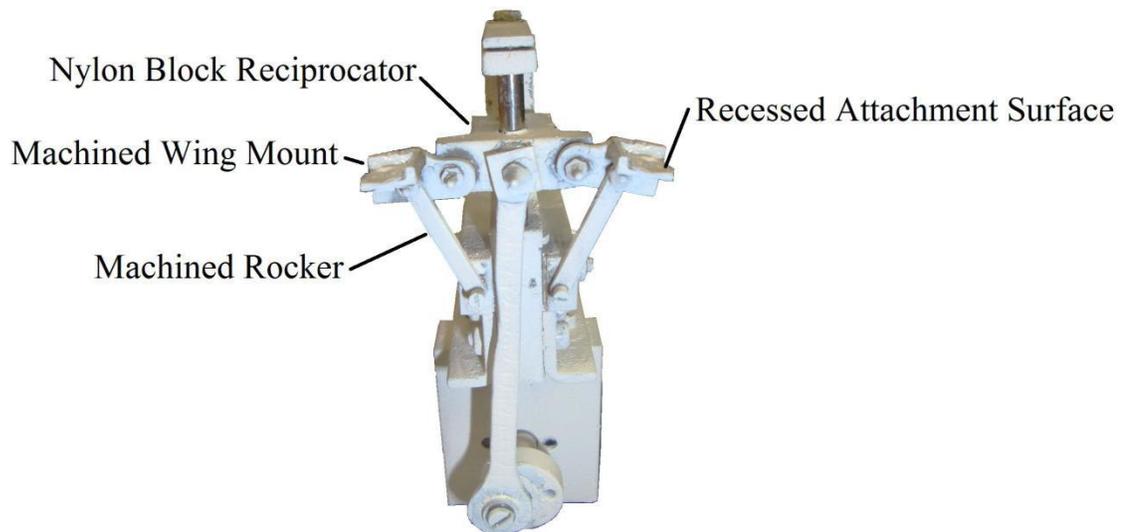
Flapping Mechanism 2 equipped with a nylon block and machined parts.
